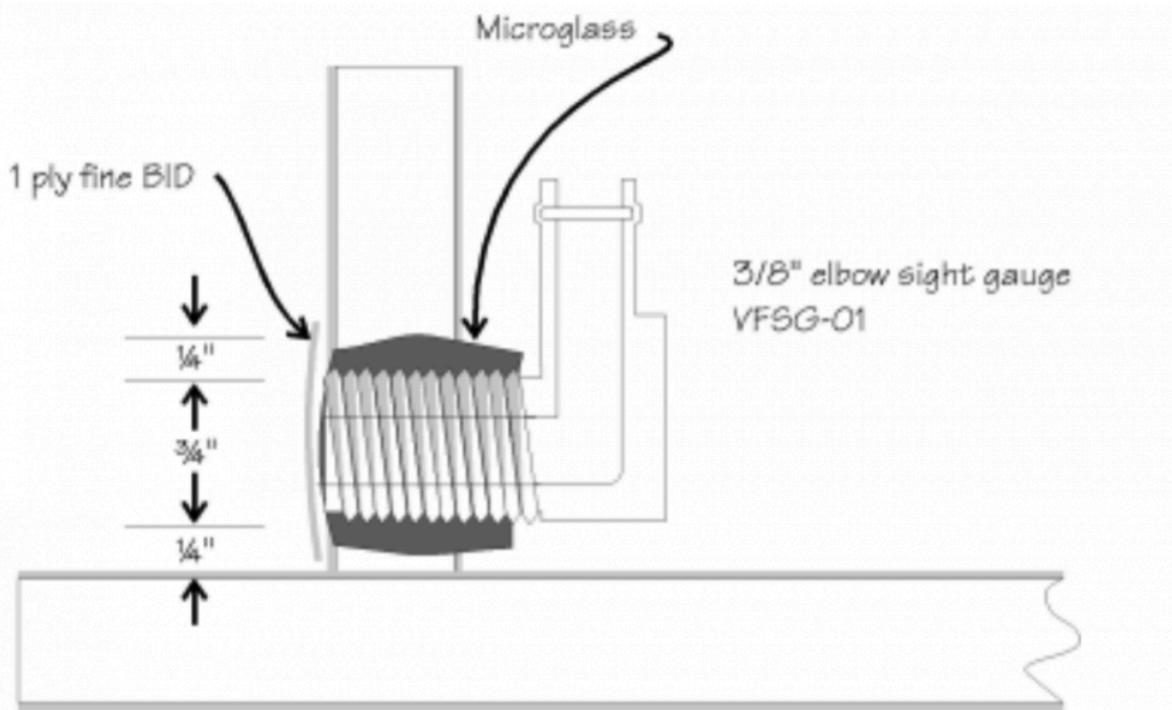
Bulkhead Fuel Sight Gauge Fitting Cross-Section
